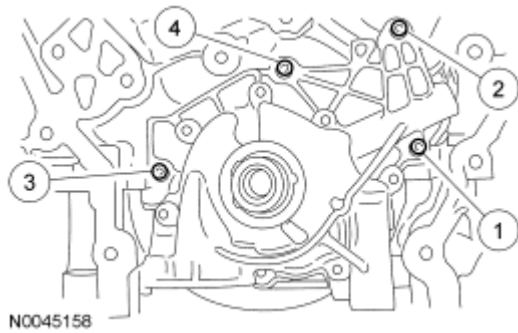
Identifying Removal Sequence Of Oil Pump Bolts
